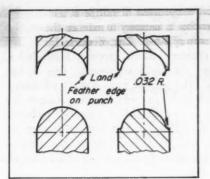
Parts pressed with a radius on the punch should be designed to have a small land to avoid premature tool breakage
